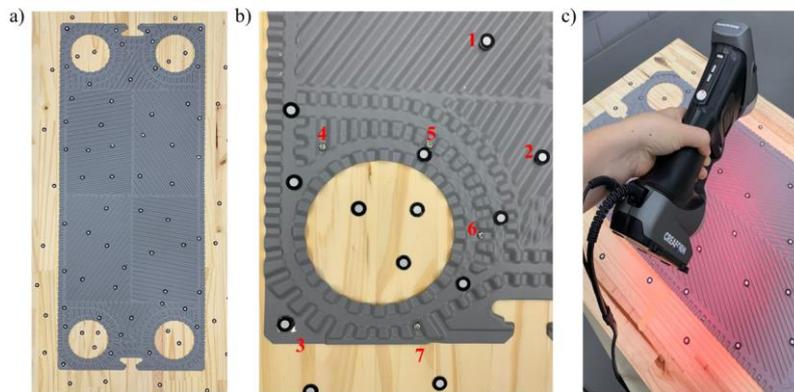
Positioning of the targets on the corrugated plate: (a) entire plate, and (b) in the distribution section.
